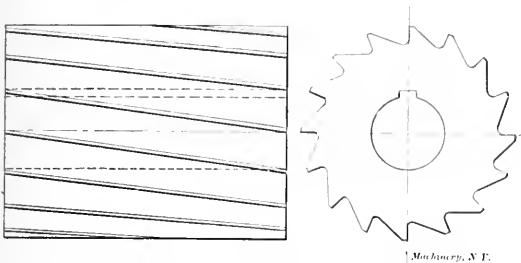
Plain Milling Cutters with Spiral Teeth.
